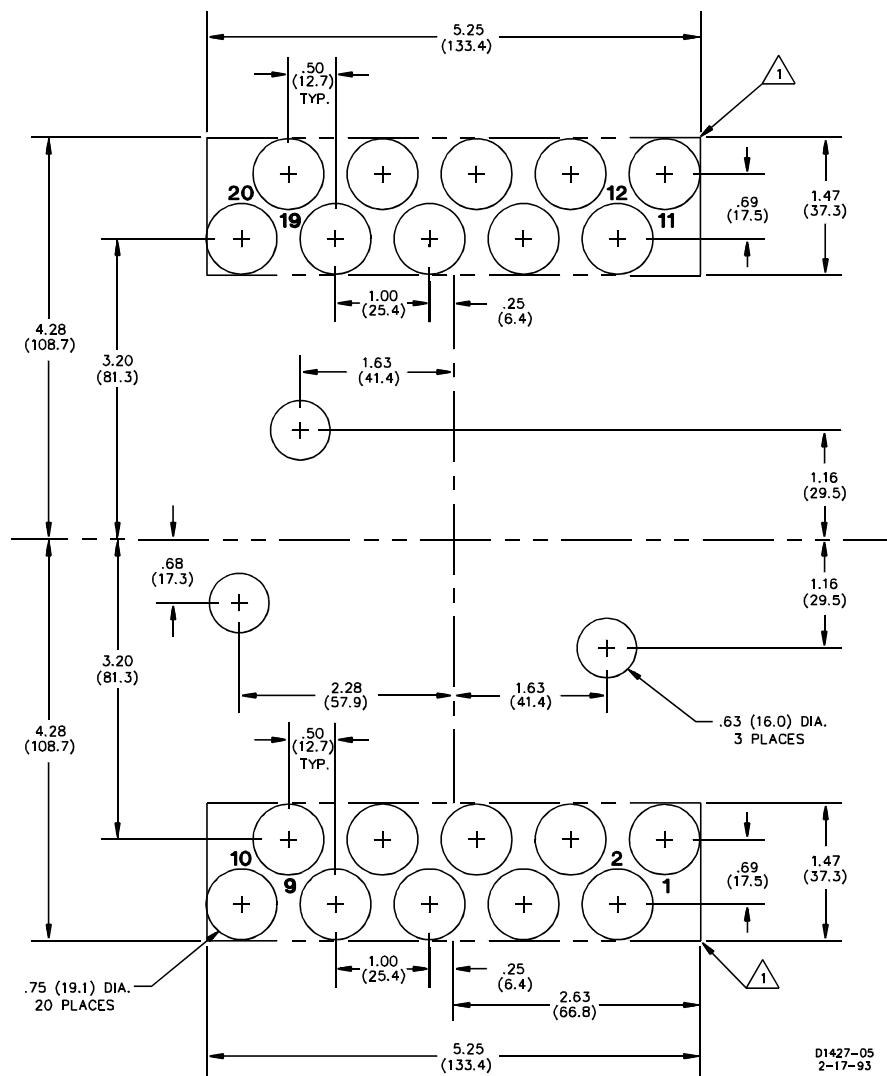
S1 Case, Double-Ended, Projection Mounting, Panel Drilling Diagram, Rear View
